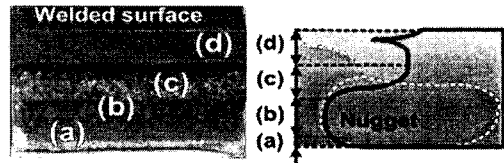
Fractography analysis of friction stir welded zone
